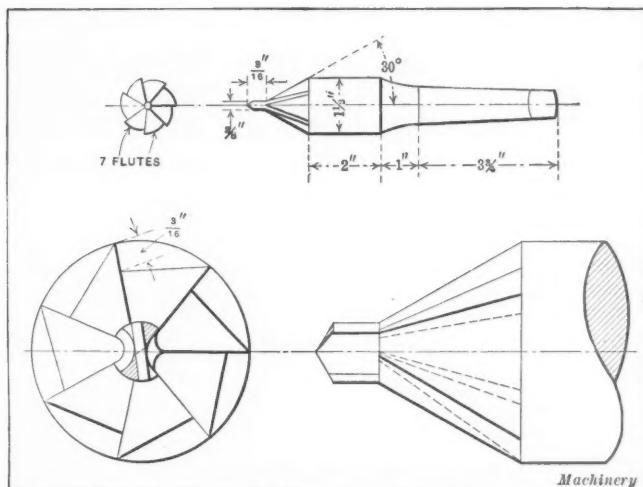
Close View of Re-centering Tool and Enlarged View of Point axle around to center the opposite end; and when the condition of the axles is such that about half of them have to be re-centered before they can be set up on the lathe, this tool is the means of saving a great deal of time. M. K.
